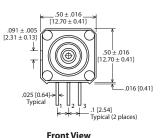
SHA-22: Concentric Shafts, B22, 3 Potentiometer(s) or RS + MP, 1/4" Bushing
